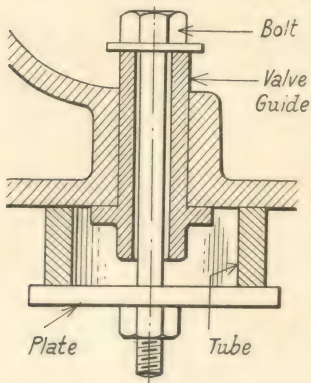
REMOVAL OF VALVE GUIDE AND SCREW PRESS
